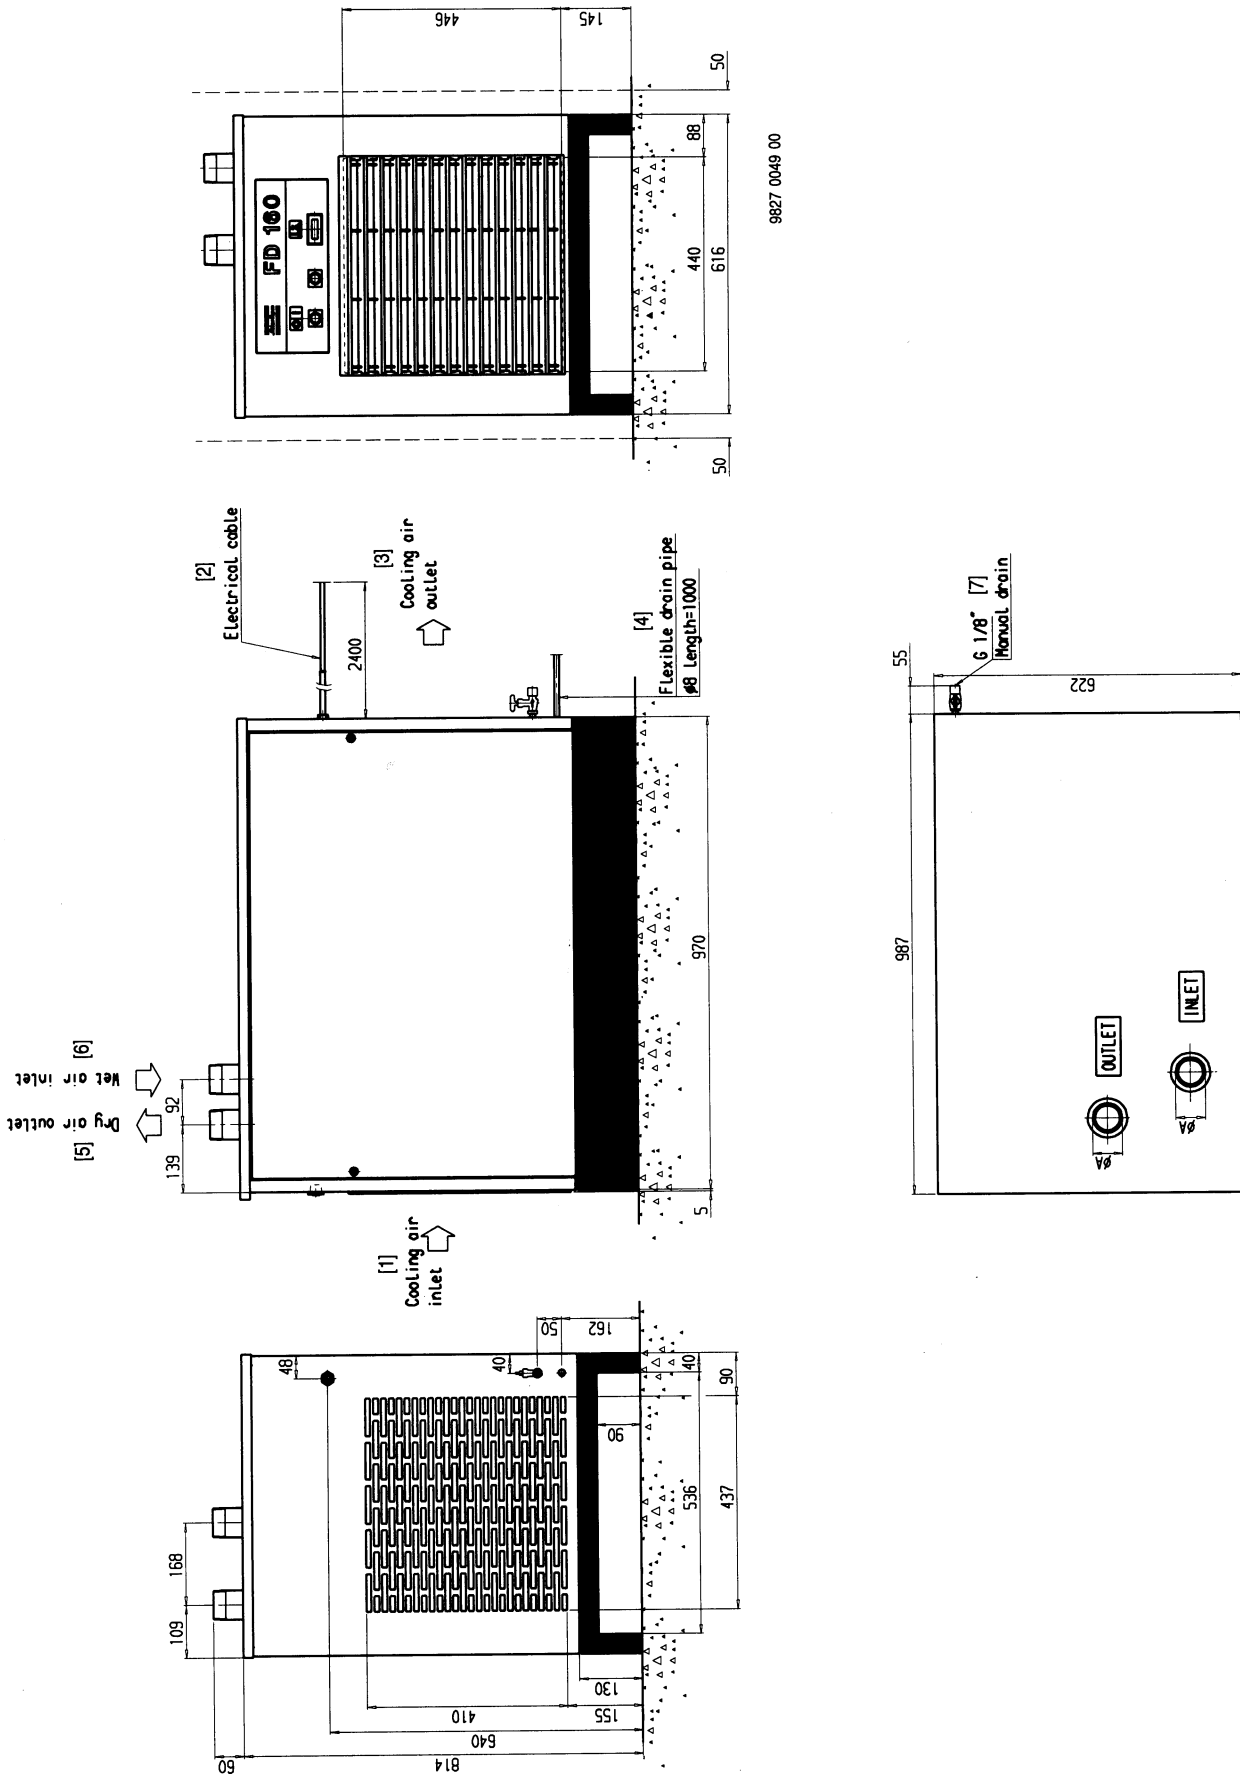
Dimension drawing of FD80, FD100, FD120 50/60 Hz and FD160 50 Hz
